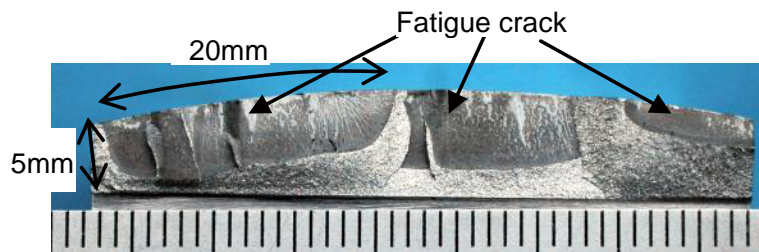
Fatigue testing results of full-scale axles - Maximum fatigue crack observed in the improved axle -
